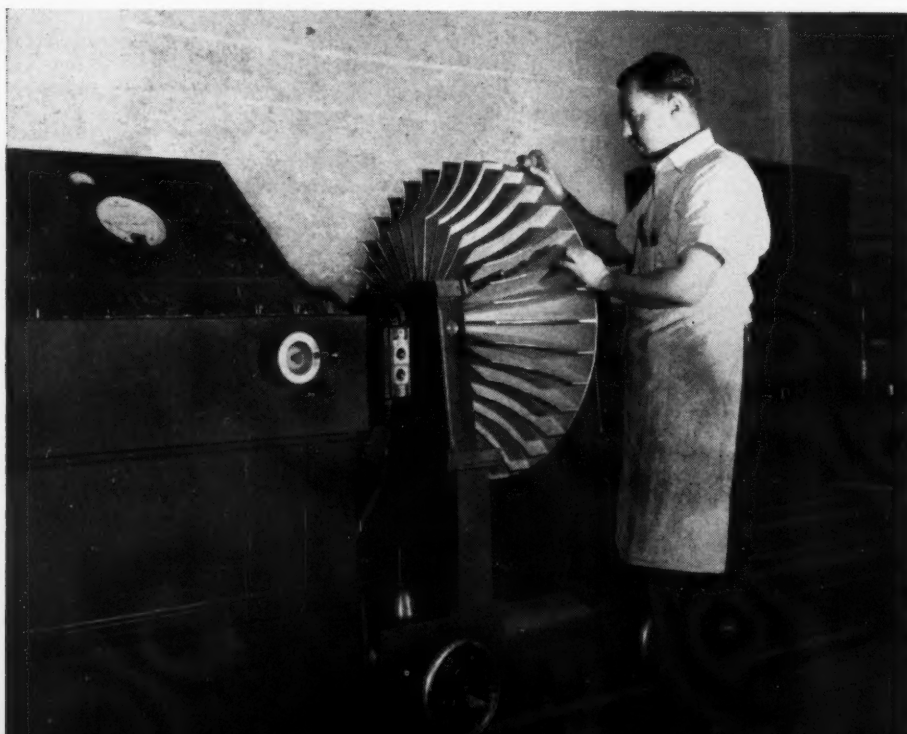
An impeller for the two-stage centrifugal flow compressor used in the "Typhoon" engine is balanced on the machine shown in this illustration
